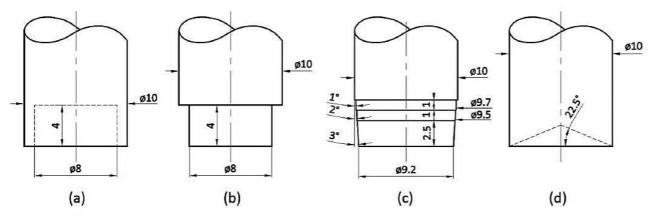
New punch designs investigated (all dimensions in mm): (a) type IV; (b) type V; (c) type VI; (d) type VII
